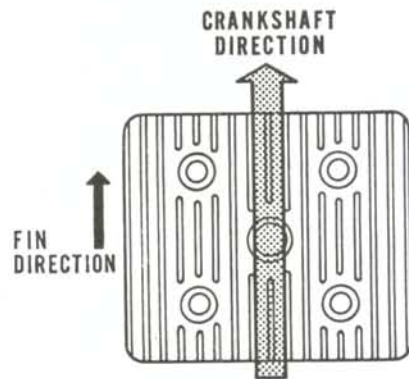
Cylinder head fins are installed parallel with crankshaft on single cylinder models.
